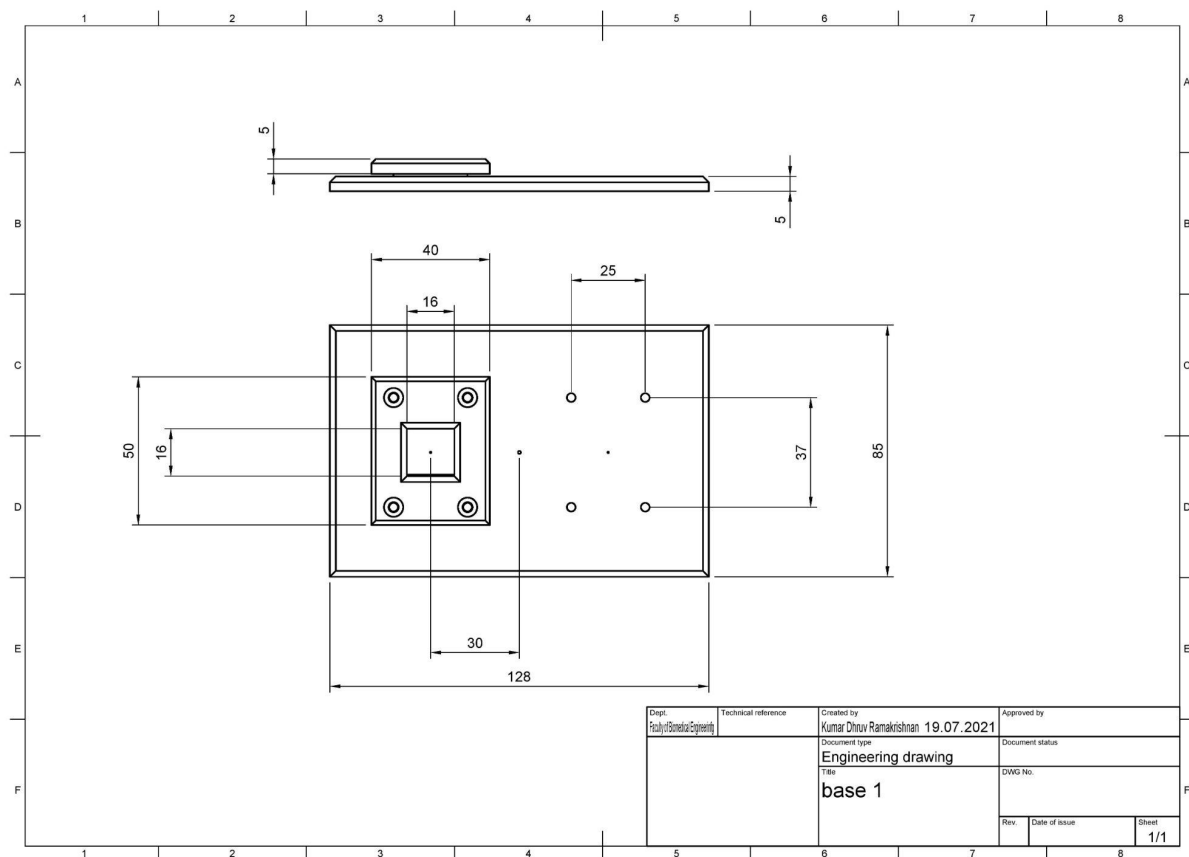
Fixture design 1 Version 1 (B1V1)
